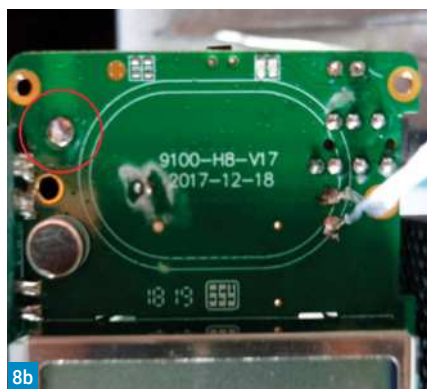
The antenna pad. Fig. 8b: Ready for surgery. Fig. 9: Fitted to lens with reflector prior to filling with resin. Fig. 10: The completed unit with SMA/BNC adaptor.
